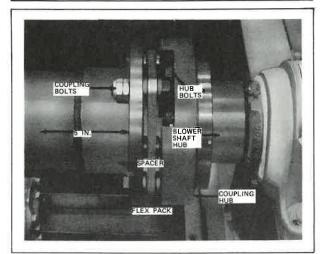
EQUIPMENT BLOWER FLEXIBLE COUPLING.
